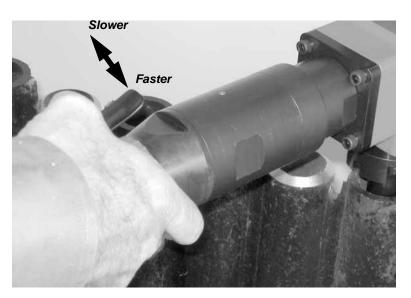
Depress the air motor trigger to start the machine. Use the trigger to control the rotating speed.
